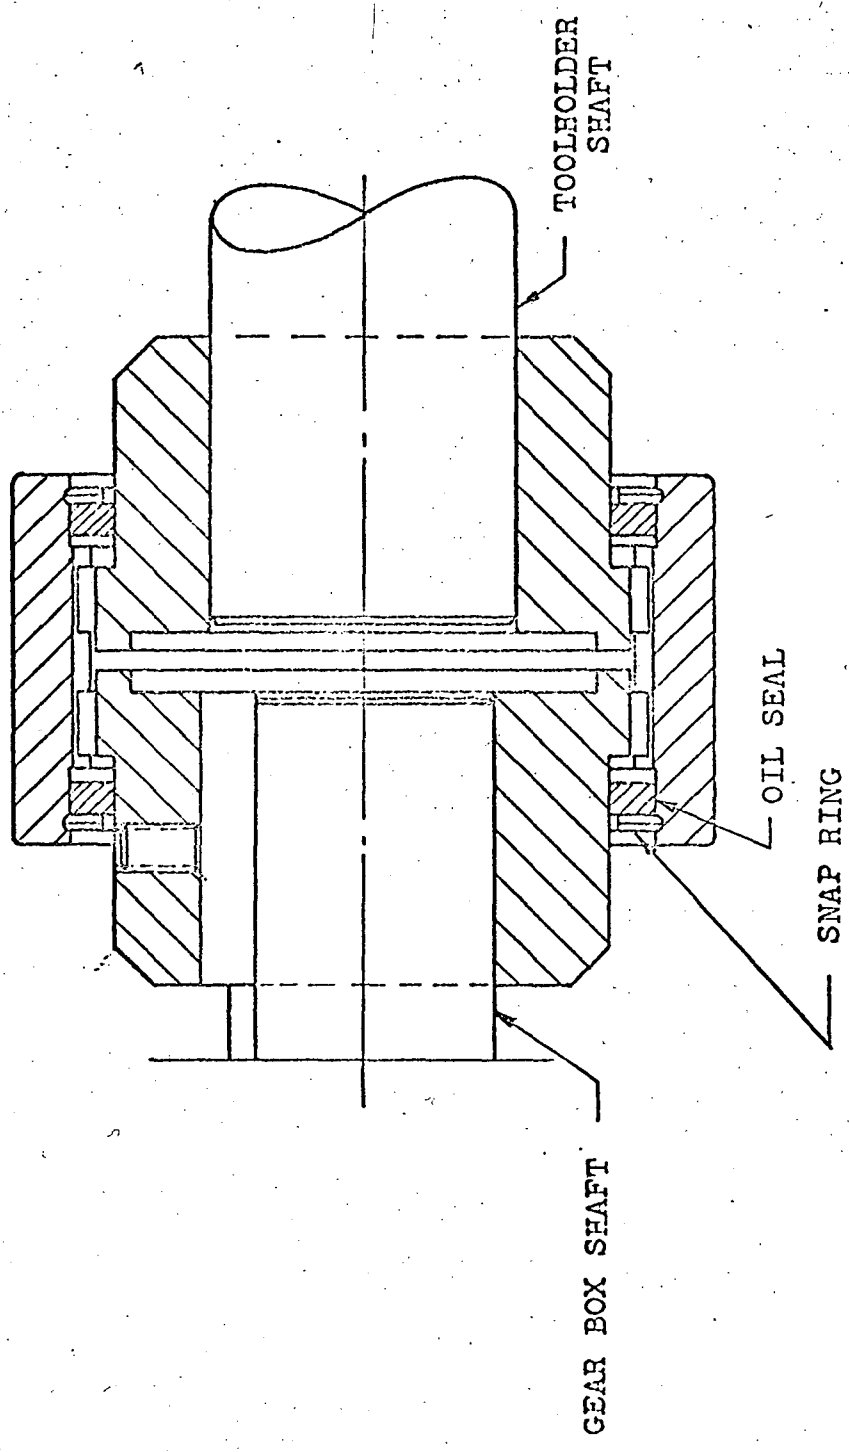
Gear Coupling Used on Fatigue Testing Machine.
